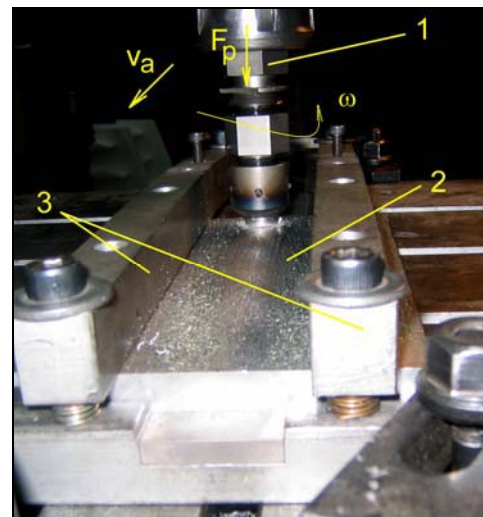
FSP of AA6061-T4 alloy: 1) processing tool; 2) AA6061-T4 probe-plate; 3) clamping device; F_p – pressing force; v_a – travel speed; ω - rotation speed.
